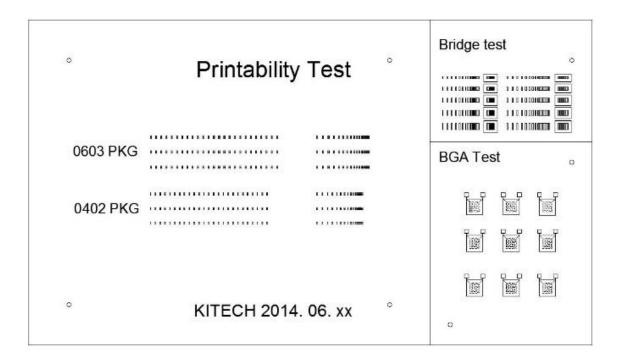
Schematic showing the design of the test PCB for the solder printability, bridging, and BGA tests.
